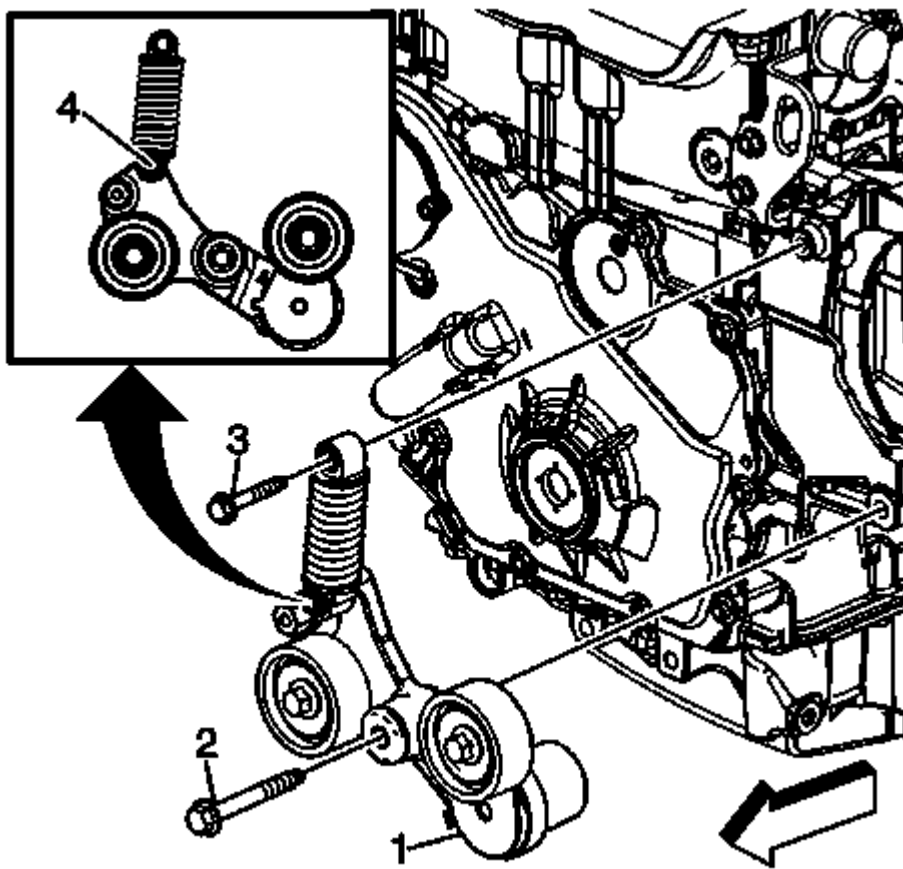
Accessory Drive Belt Tensioner And Bolts
